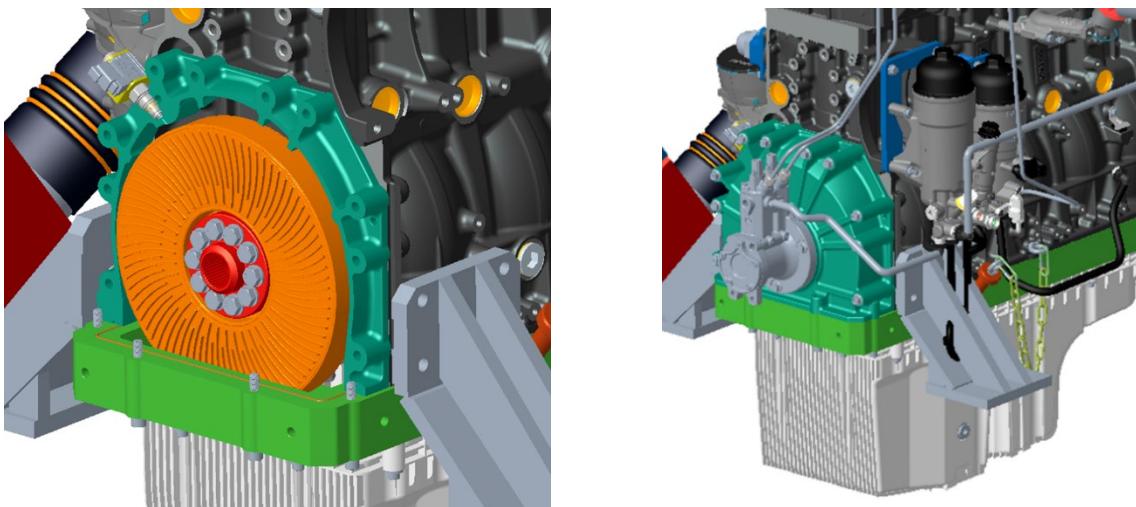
Front Cover / Damper & Crankshaft Driven Fuel Pump
